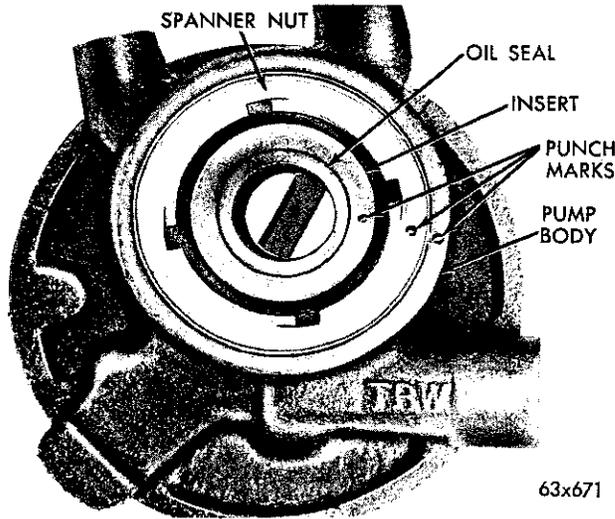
Center Punch Marks on Pump Body Spanner Nut and Front Insert
